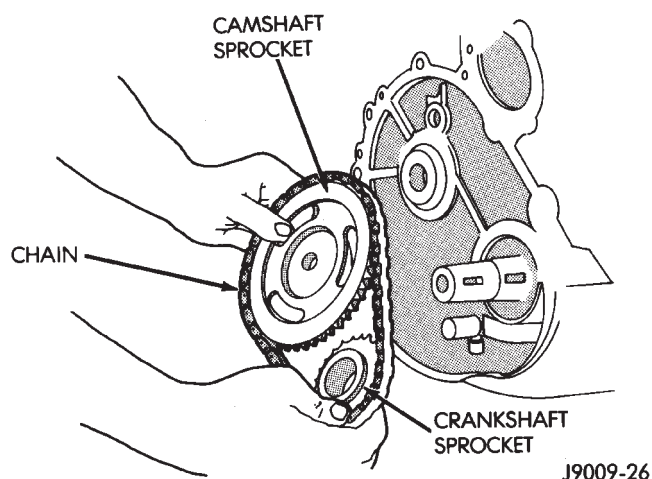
Camshaft and Crankshaft Sprockets and Chain
